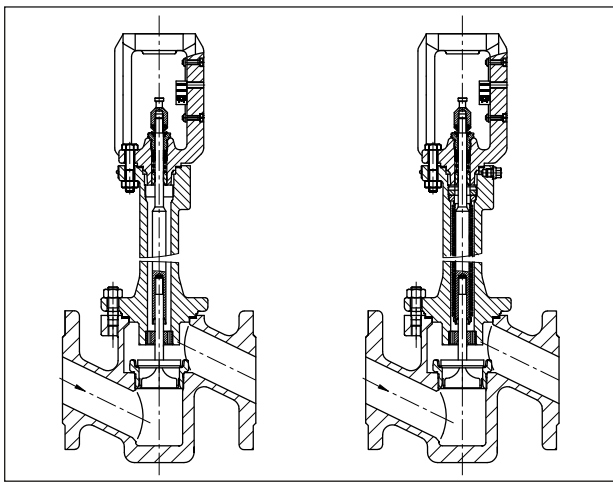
Type 3241 Valve · NPS ½ to 3 · Forged steel version
